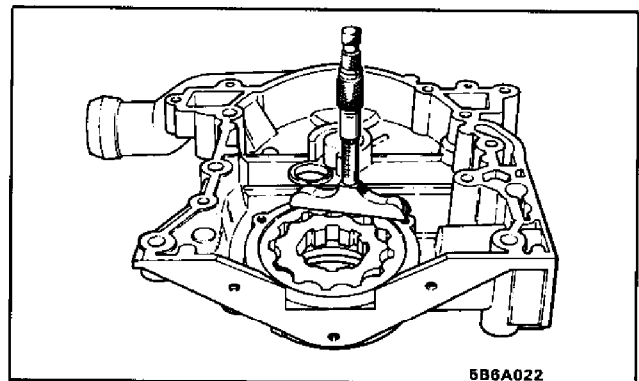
Measuring Gear End Clearance (Gear Drop In Housing)
